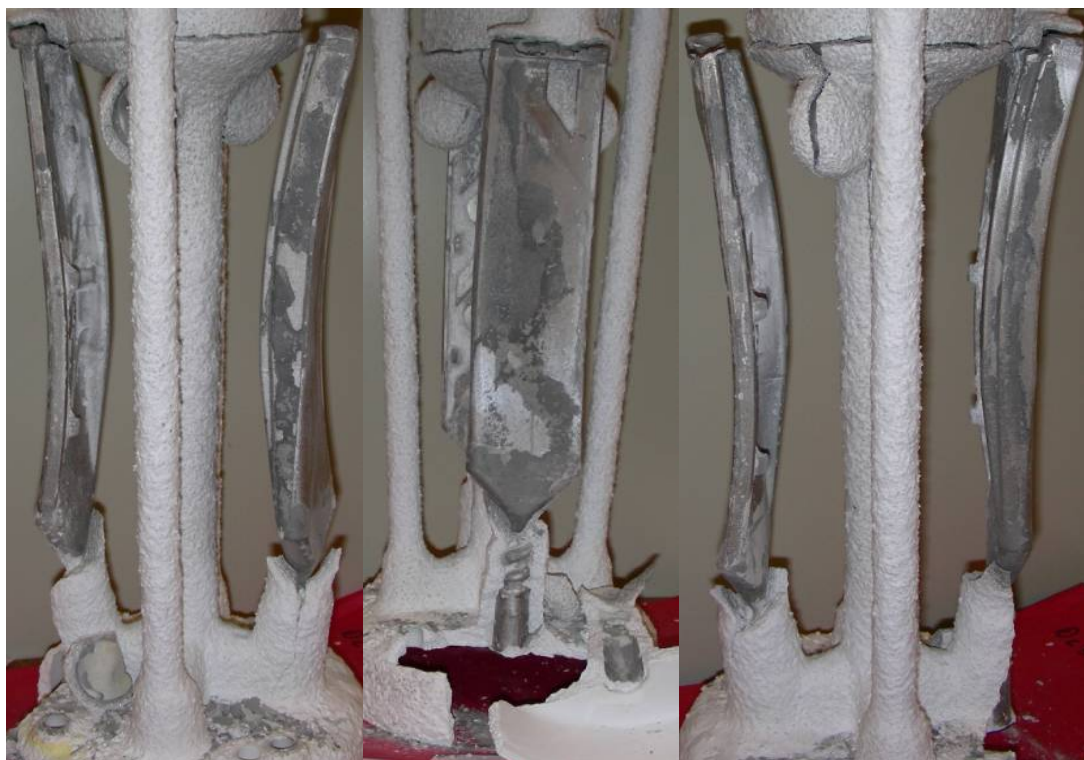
Visual appearance of CMSX-4 casting trial using shell mold with yttria aerosol spray coating but without yttria binder washing and soaking
